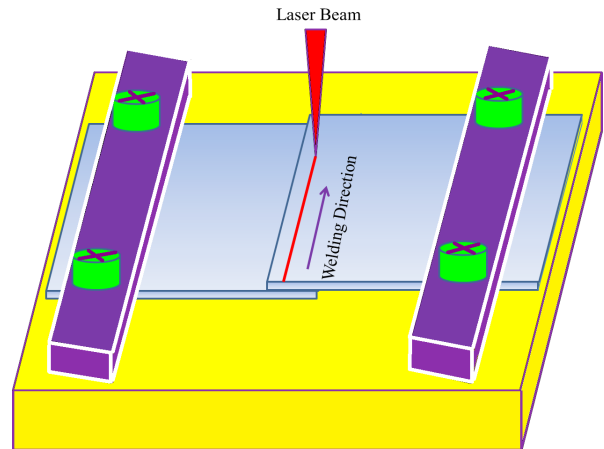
Schematic illustration of laser welding set-up.
